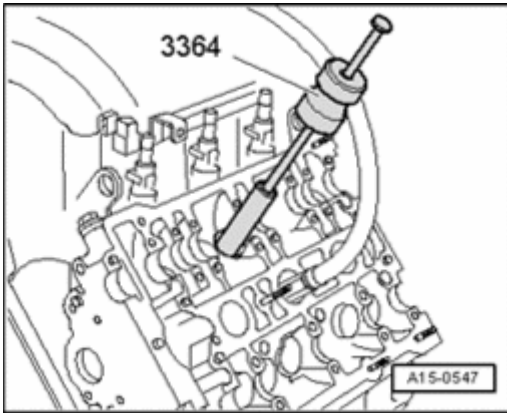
Removing Valve Stem Oil Seals Using Valve Seal Removal Tool 3364
